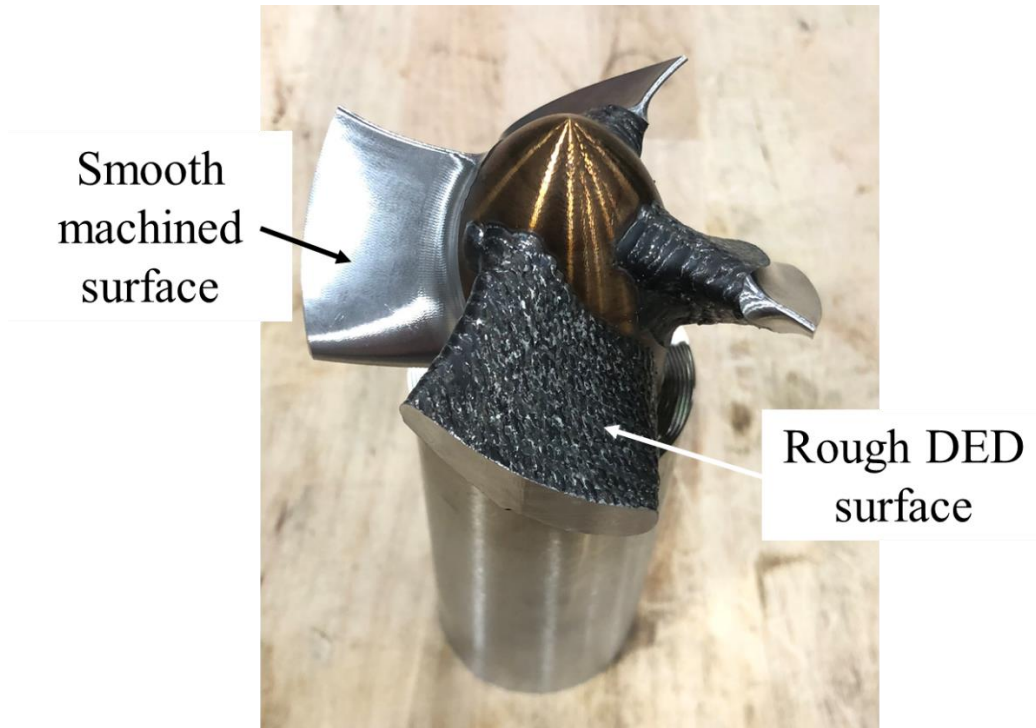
A hybrid-manufactured component that has been partially machined. DED was used for the initial shape, and machining was used to obtain a precision surface after printing.
